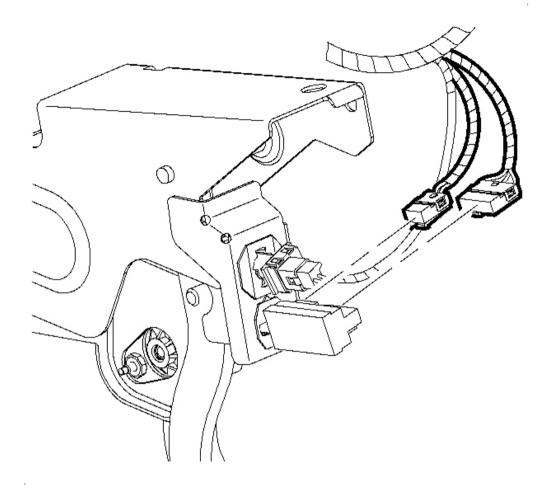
View Of Stop Lamp Switch Courtesy of GENERAL MOTORS CORP.
